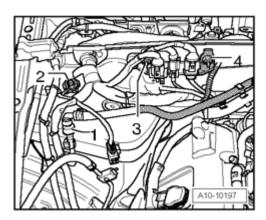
Identifying Vacuum Hose, Intake Hose & Clamp Courtesy of VOLKSWAGEN UNITED STATES, INC.
